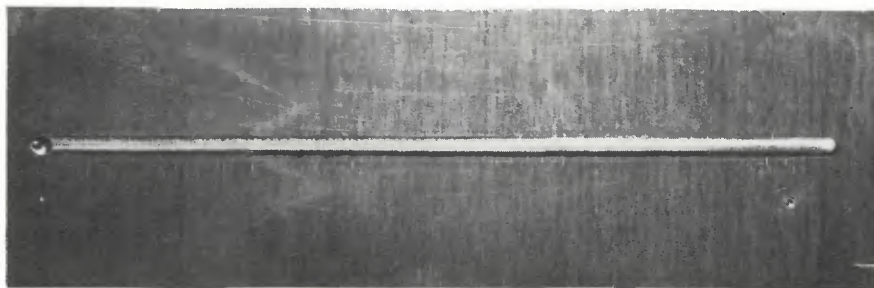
Weld bead from which density specimens were taken (X<sup>1/2</sup>)
